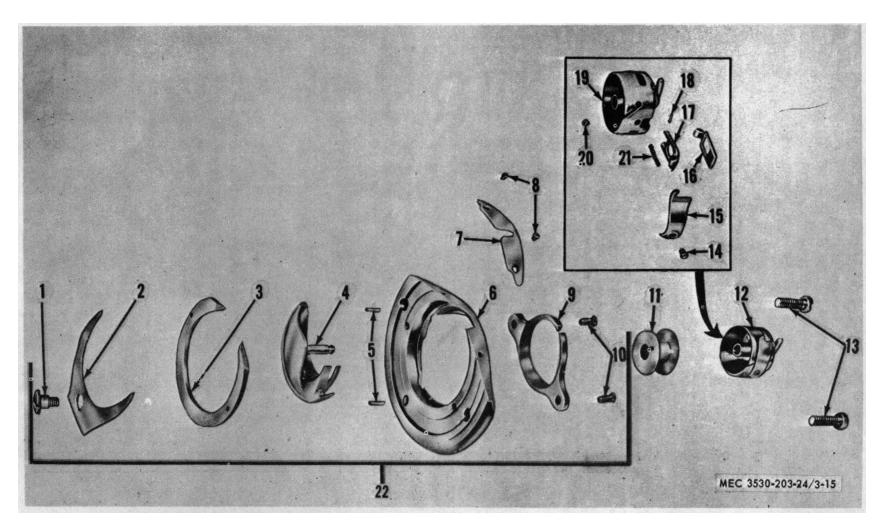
Clothing sewing machine shuttle race and bobbin case
